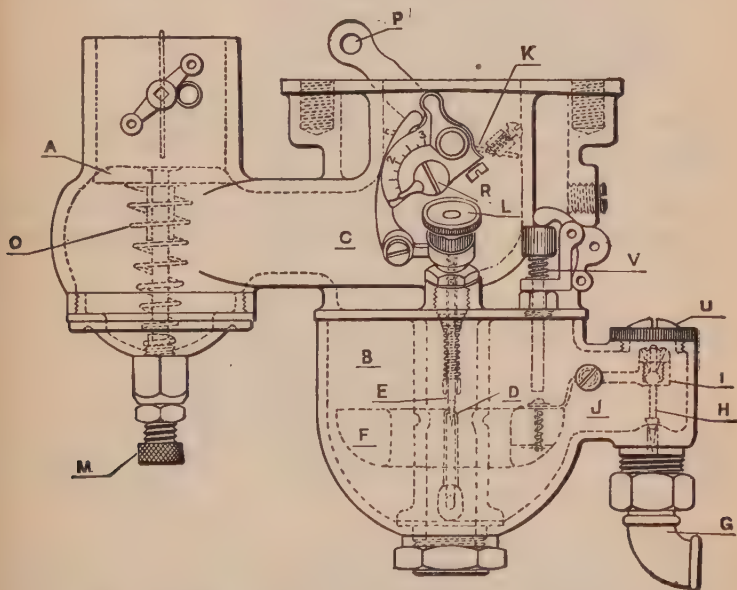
The Schebler Carburetter. A compensating air valve A, adjustable by the screw M and the spring O, controls the air supply to the mixing chamber C. Above this valve is a shutter which may be partially closed when cranking to increase the suction in order to obtain a rich mixture. The spray nozzle is located at D and the supply regulated by the needle valve E by means of a thumb wheel L. The needle valve has two adjustments, one for high speed and one for low. At R is the eccentric high speed adjustment. Throttle valve K is of the butterfly type and is operated by the lever P. Heating is secured by a jacket surrounding the throttle. Gasoline enters the float chamber B through the elbow connection G. The fuel level is maintained by the concentric float F, which regulates the supply by the inlet valve H and the lever connection J. The float point is adjustable by the needle valve adjusting screw I, accessible by removing cap U. The carburetter is primed by the tickler or flushing pin V.
